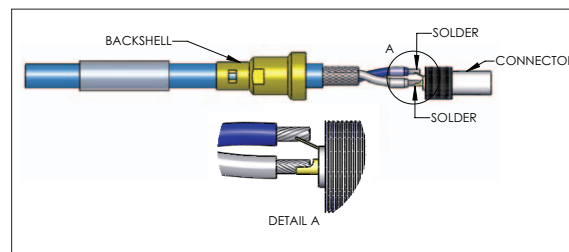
Figure C. Solder white wire on to center conductor. Solder blue wire onto inner shield contact.
